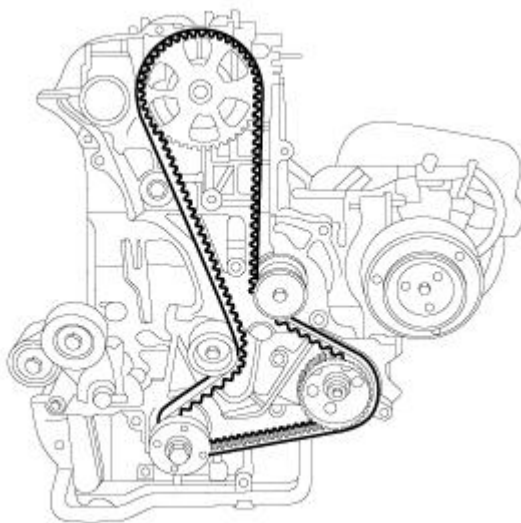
Drive Belt Tensioner And Drive Belt Routing
